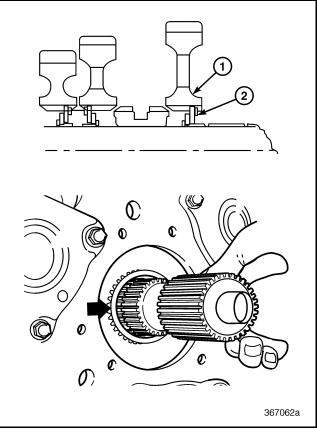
Removing Snap Ring from Inside Reverse Speed Gear (T313L/T318L Shown)
